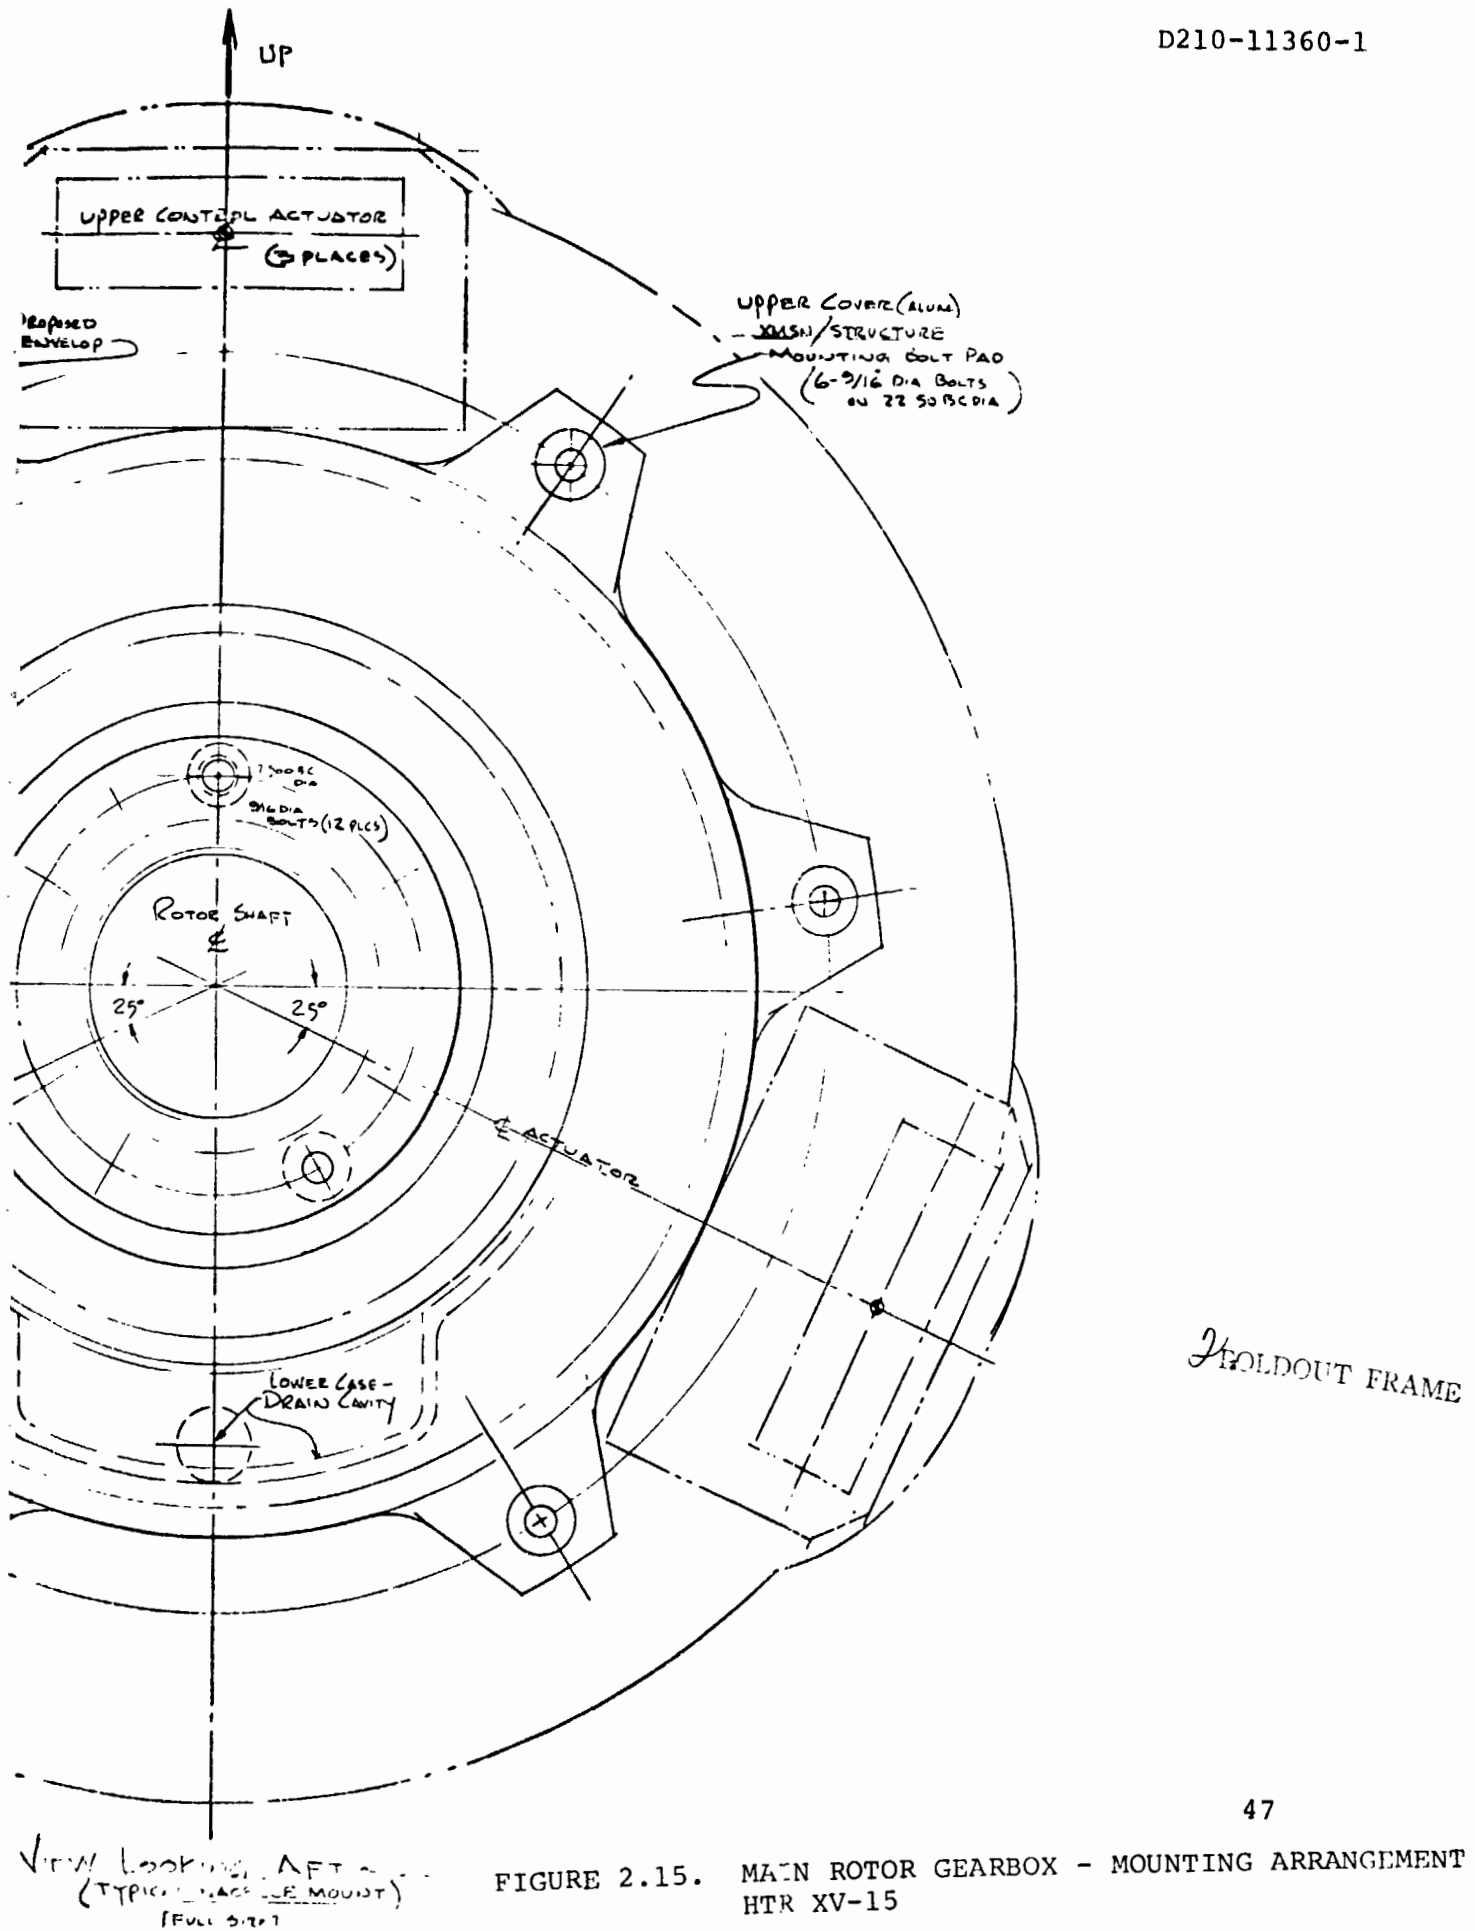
MAIN ROTOR GEARBOX - MOUNTING ARRANGEMENT - HTR XV-15
